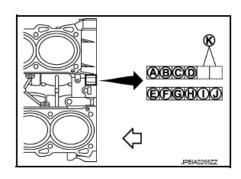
Identifying Main Bearing Housing Grade On Rear Left Side Courtesy of NISSAN NORTH AMERICA, INC.
